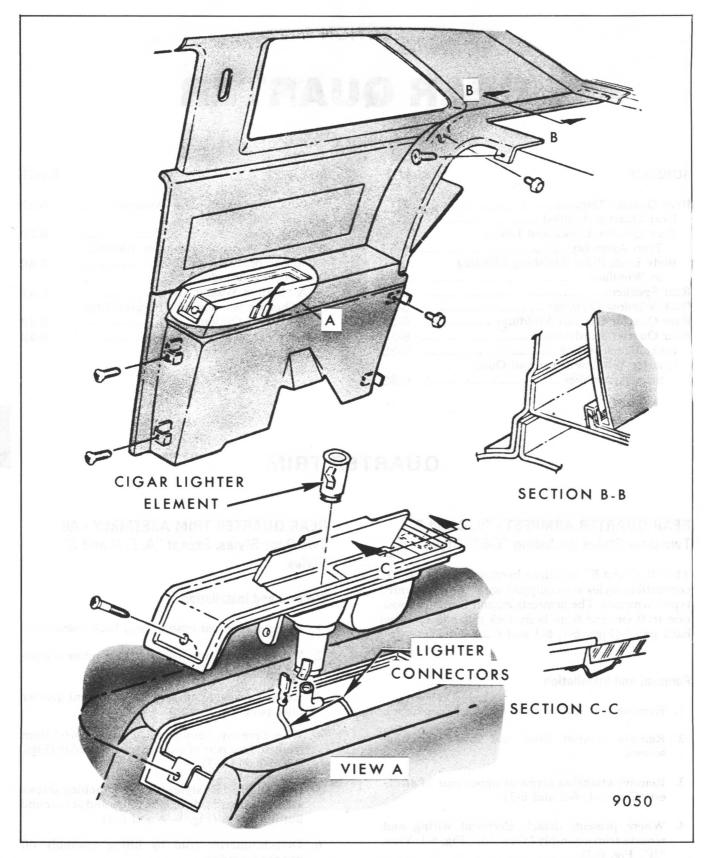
Quarter Lower Trim Assembly Attachment - Two-Door Hardtop Styles ("C" Style Shown)
